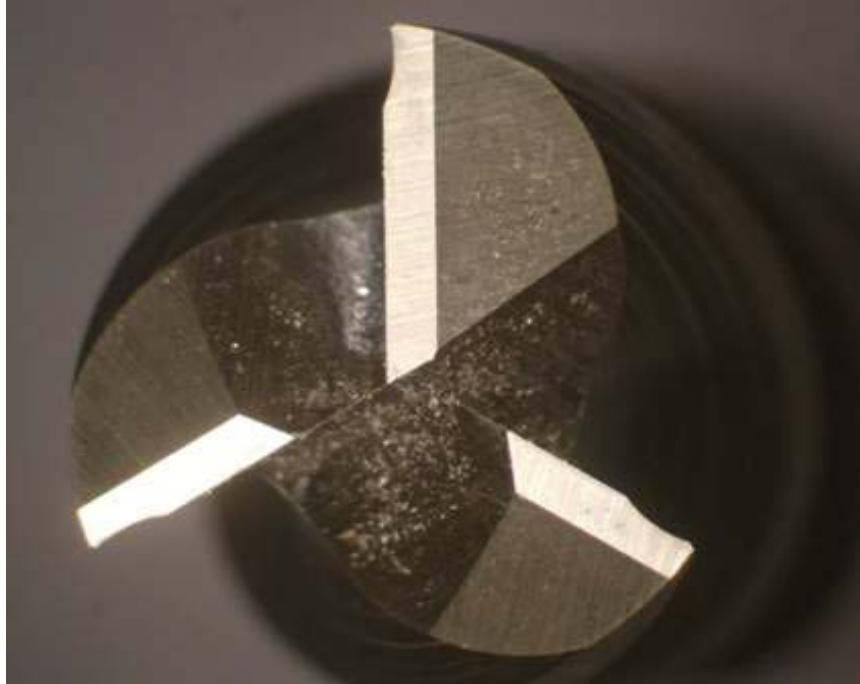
Bottom view of the endmill showing the three cutting tips.
